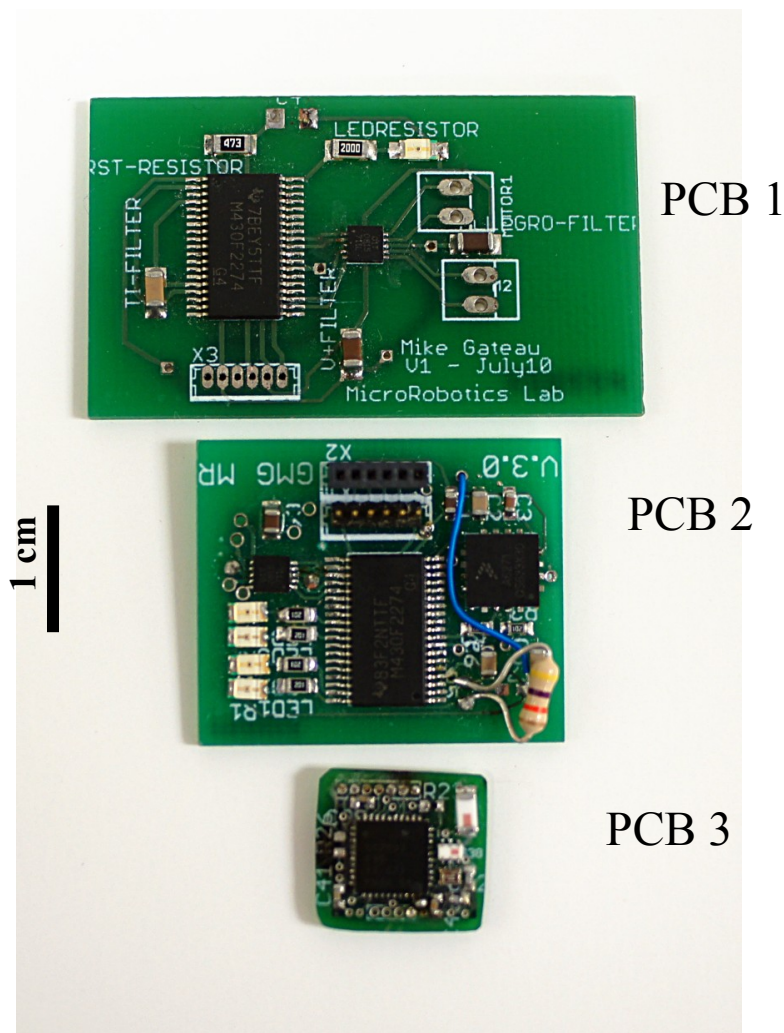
Three Revisions of Base Module (Most Recent Is Bottom Board)
